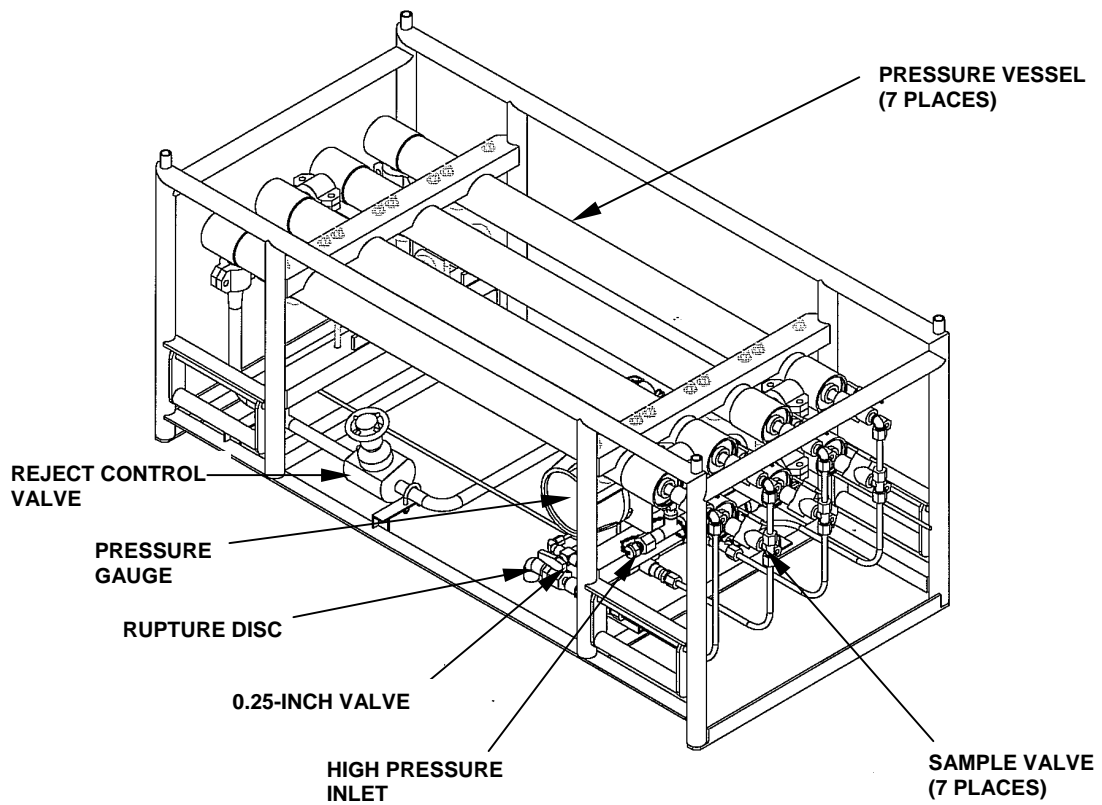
Reverse Osmosis Element Module (Front and Left Side).
